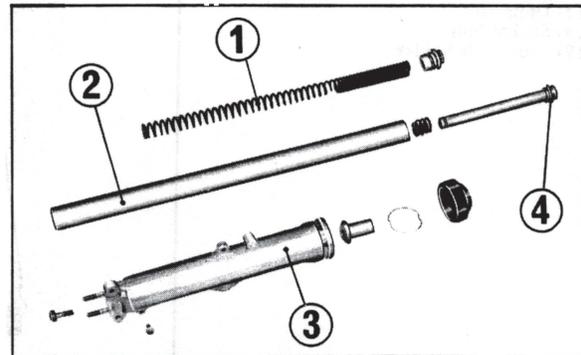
(1) Front shock absorber spring (3) Bottom case
